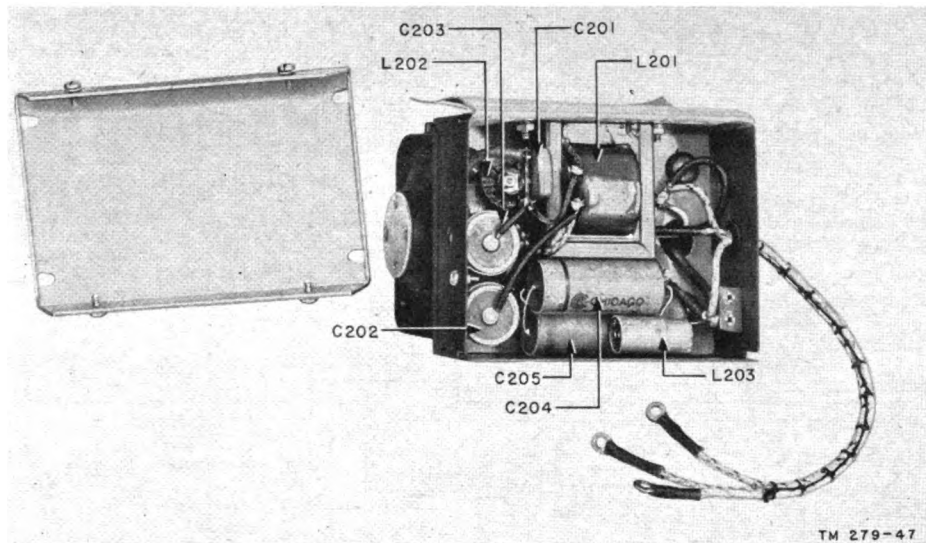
Dynamotor power supply, bottom view, cover removed, serial numbers 75 to 137 inclusive.
